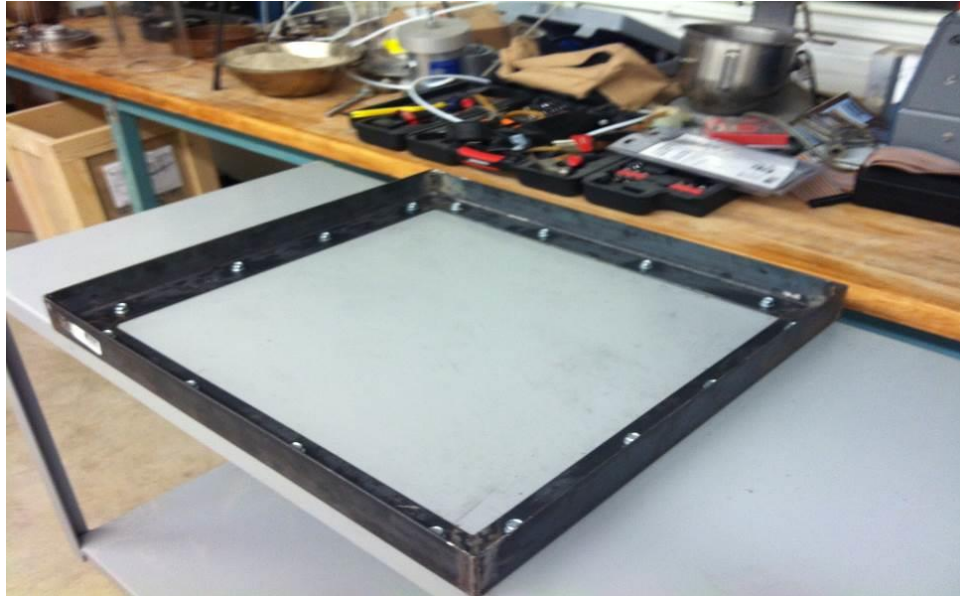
Angle steel ends cut to 45 degrees to allow for welding of a square base.
